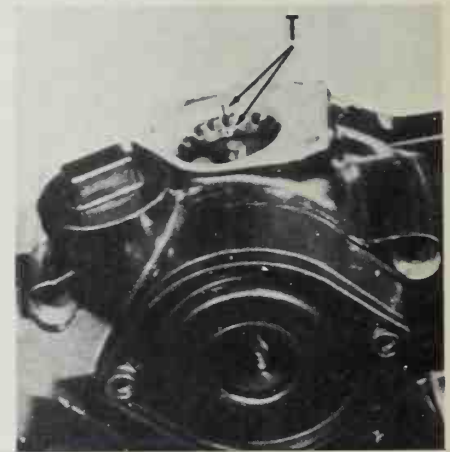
View of timing marks (T) on camshaft gear and tappet housing opening in front cover.
